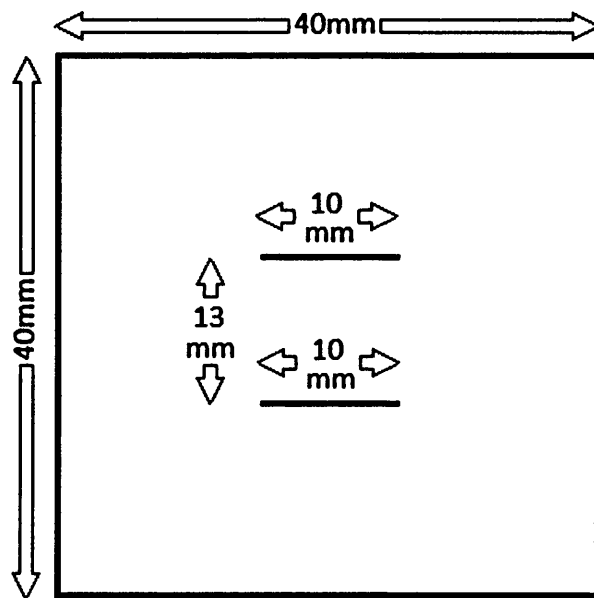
Dimensions and positions of defects on AA6111 coupons
